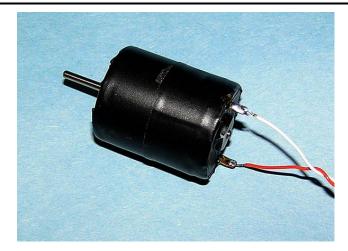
Tether Cable Wires Soldered to a Motor
